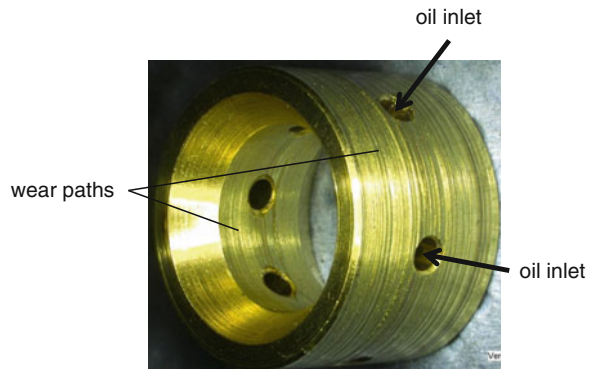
Abrasive wear mechanism in a radial bearing
